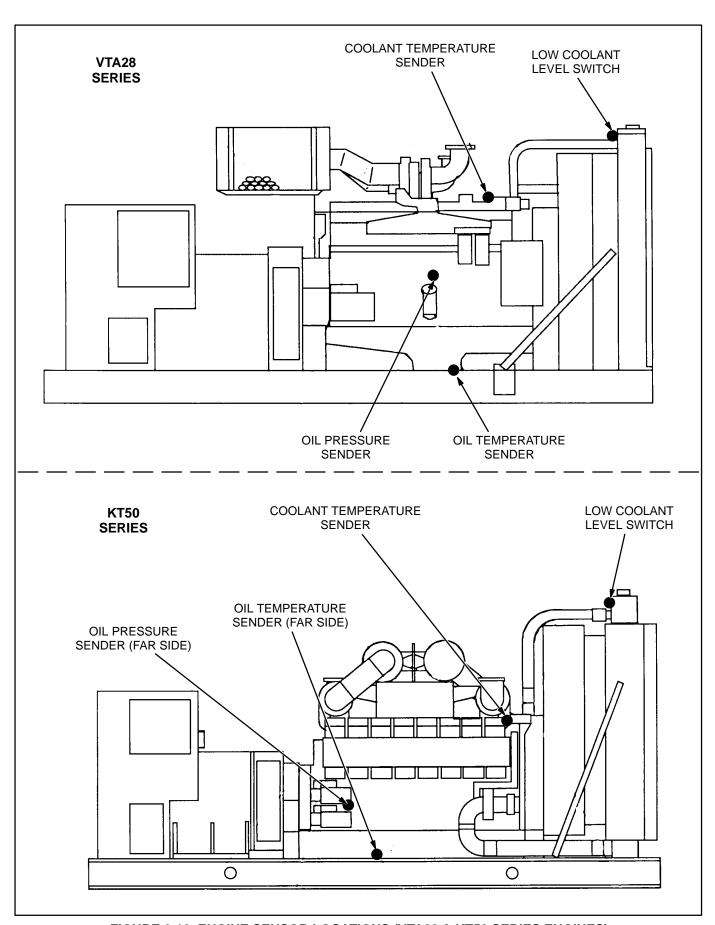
ENGINE SENSOR LOCATIONS (VTA28 & KT50 SERIES ENGINES)
